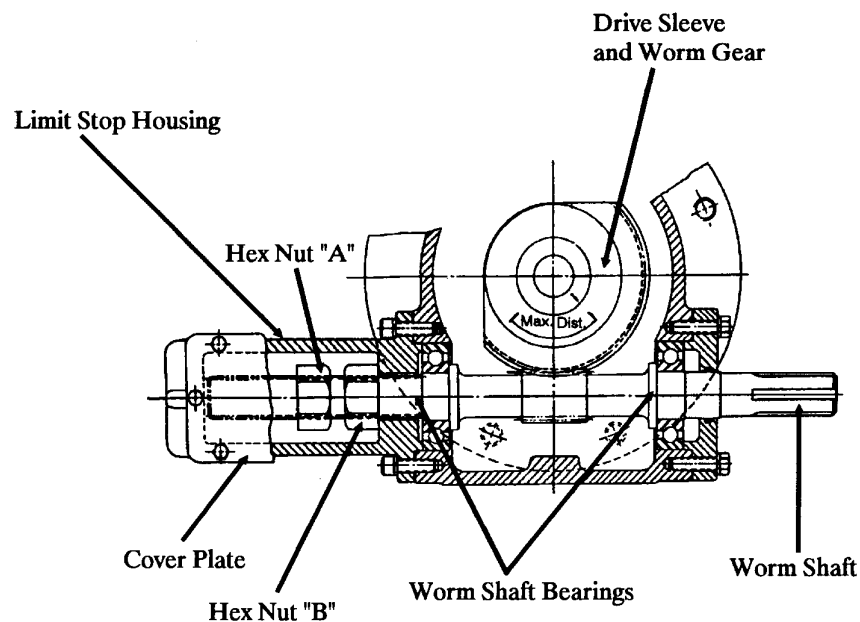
Hex Nut Type Stop (HBC-0 Through 3)
